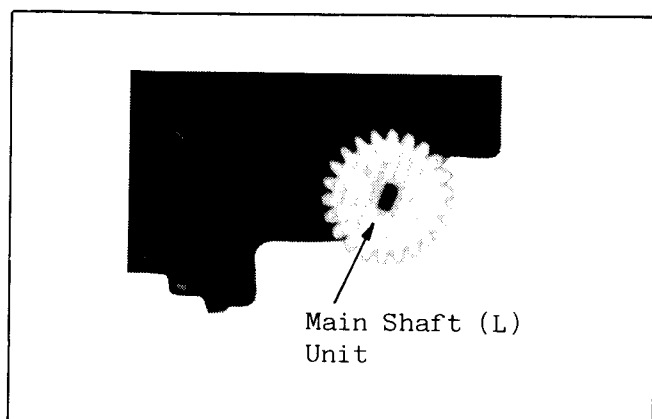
Adjustment of Cassette UP Gears-(8)
